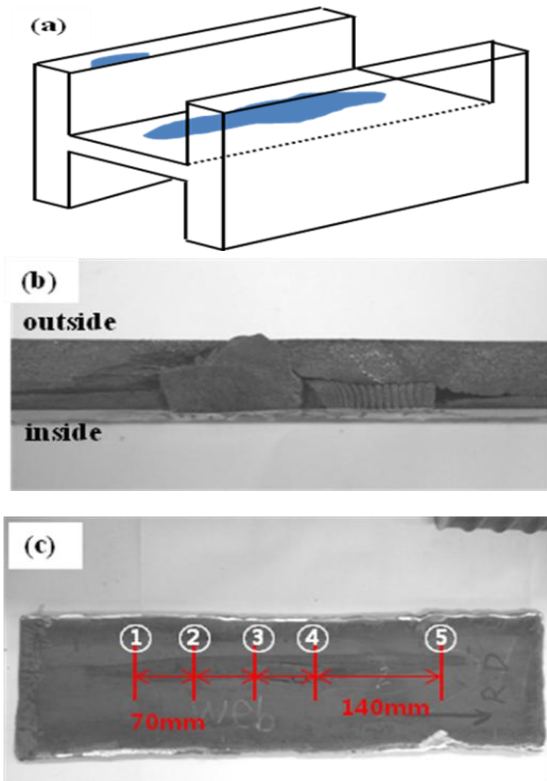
Shape and location of deformed bolt (a) schematic drawing, picture of deformed bolt at (b) flange area (c) web area
